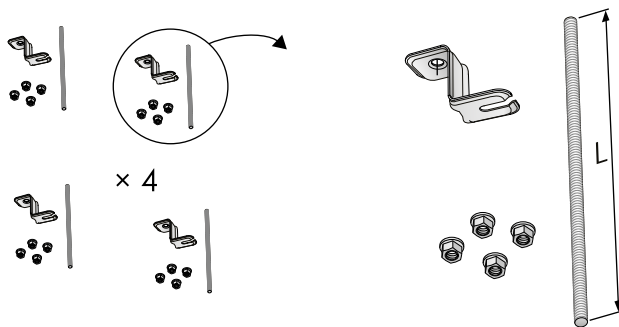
Assembly fitting SYST MS M8-1, ceiling mount and threaded rod
